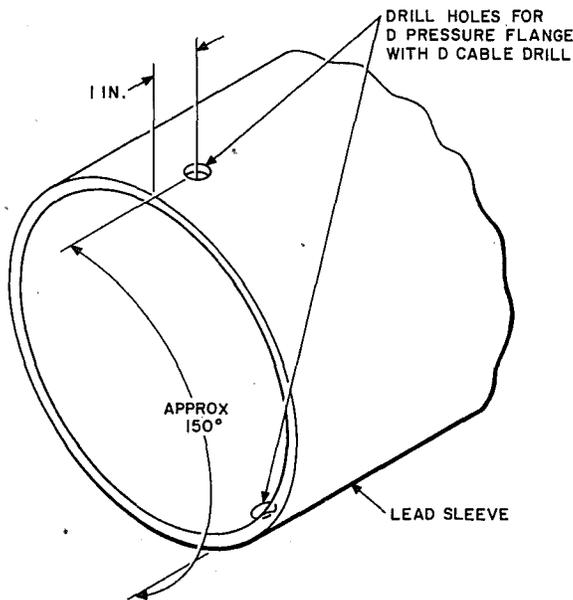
Location of Holes for D Pressure Flange in Lead Sleeve
